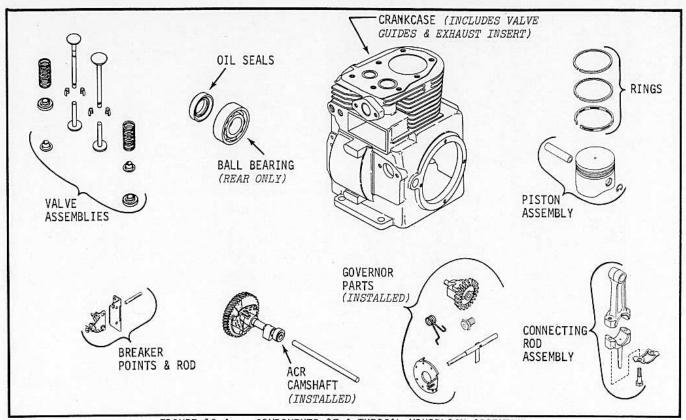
COMPONENTS OF A TYPICAL MINIBLOCK ASSEMBLY
